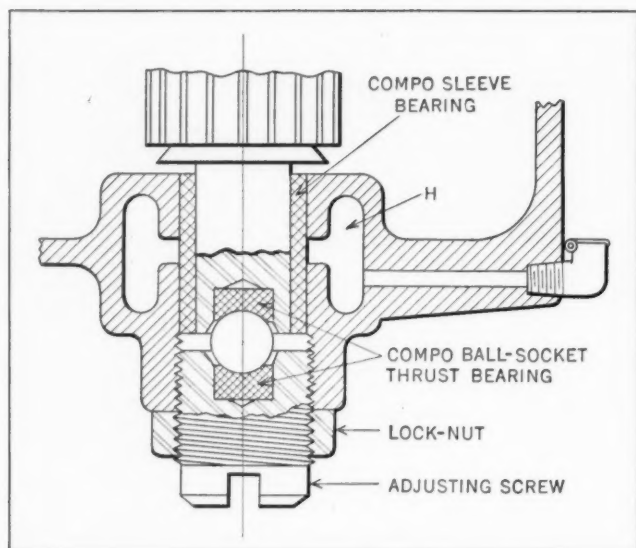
Single-ball Thrust and Radial Bearing of Porous Bronze Applied to a Vertical Motor
